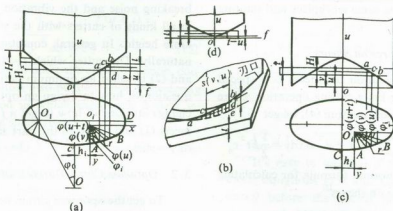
Slanting knife cutting operation analysis for an axially symmetric workpiece
